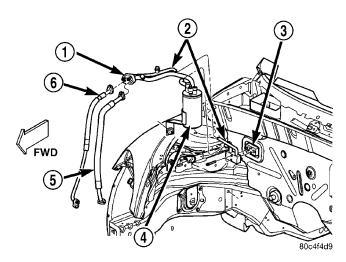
Suction and Liquid Line Assembly Remove/ Install - LHD shown (typical RHD)
